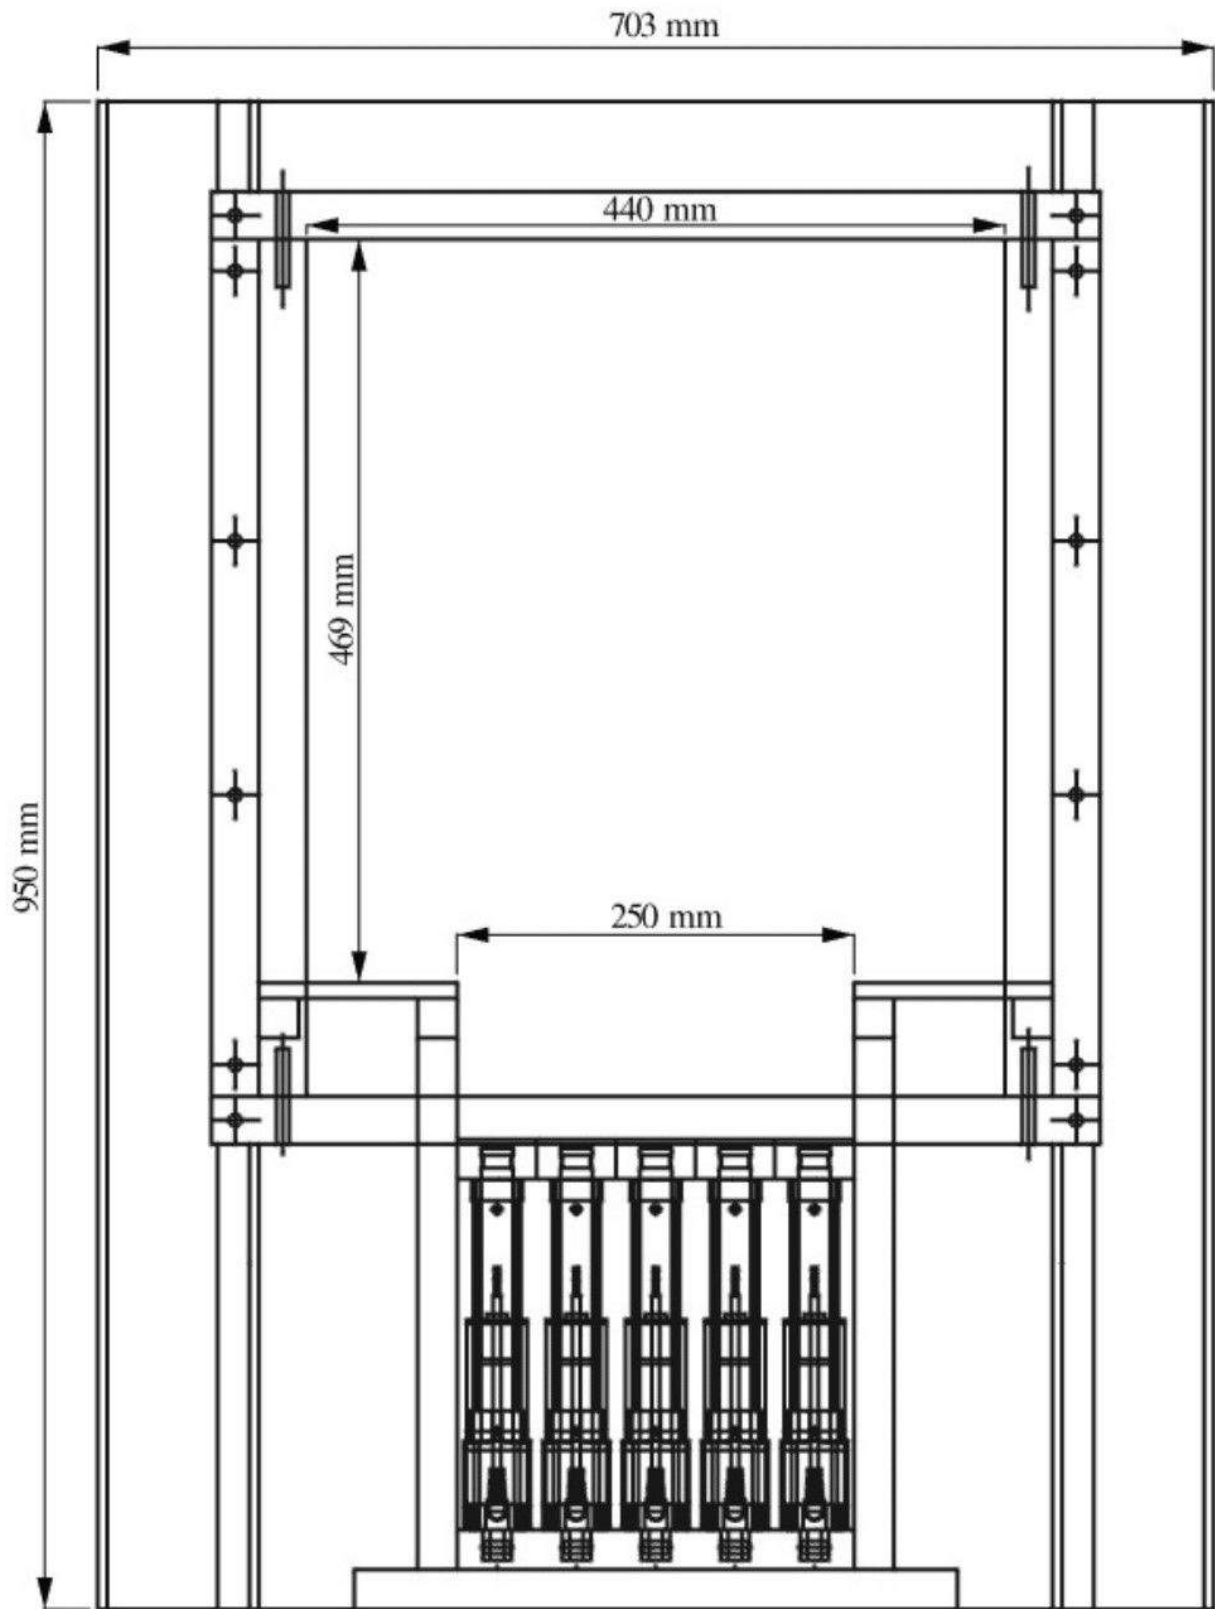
Dimensioned schematic of the complete test frame used in centrifuge testing.
